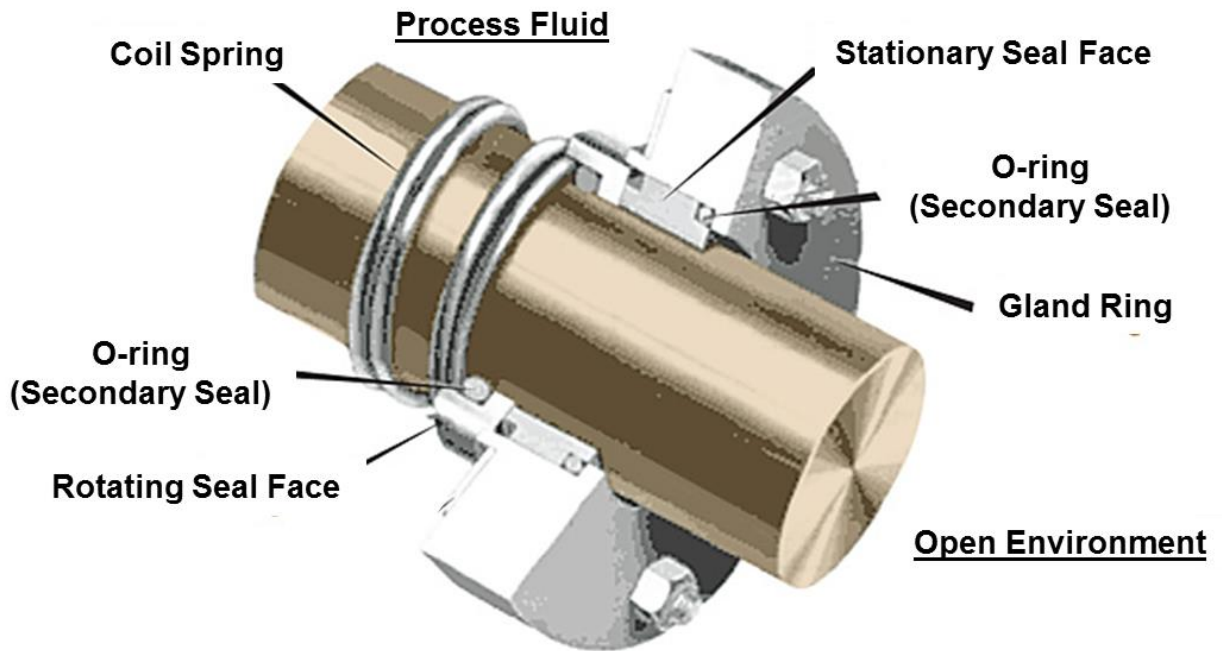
Example configuration of a simple parallel spring mechanical seal [8]. The gland ring attaches the stationary seal components to the pump casing.
